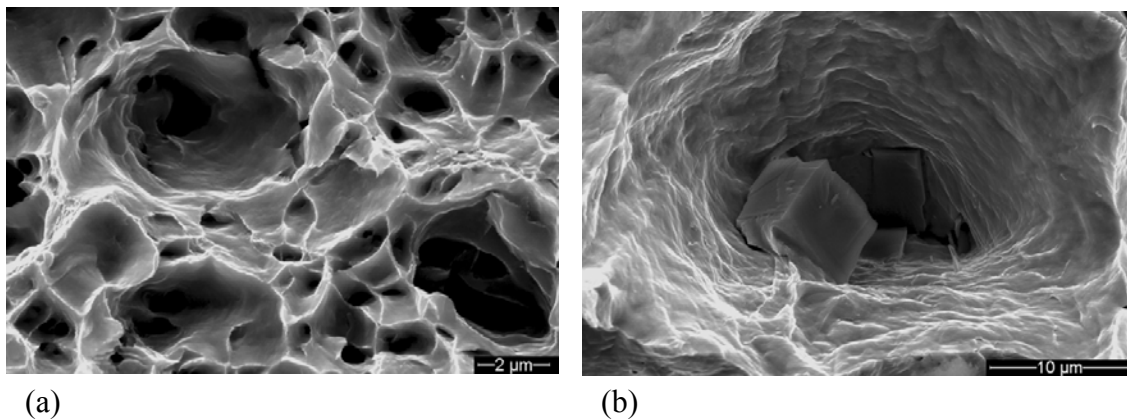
SEM image showing a closer look at the dimples on the fracture surface of the tensile tested steels (a) AISI 410 and JYH21CT
